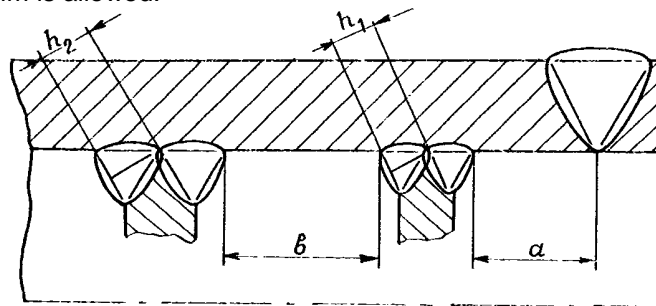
Arrangement of welds for welding components to surfaces of equipment and pipelines
